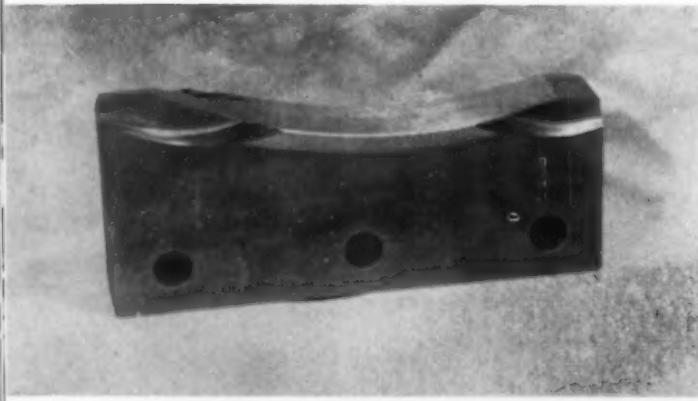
(above) Closing shoe for an automatic screw machine collet restored by arc welding and careful peening over hot surface. Both pre-heating and postheating were closely controlled.
